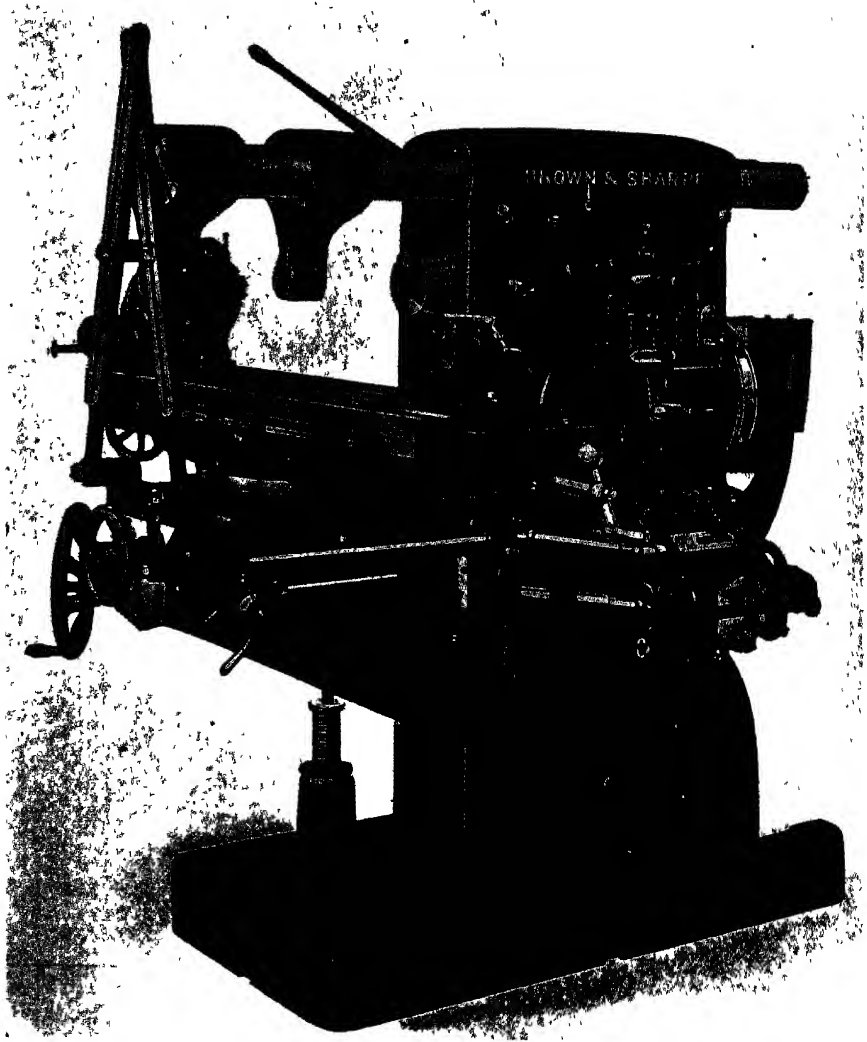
BROWN & SHARPE UNIVERSAL CONSTANT DRIVE
